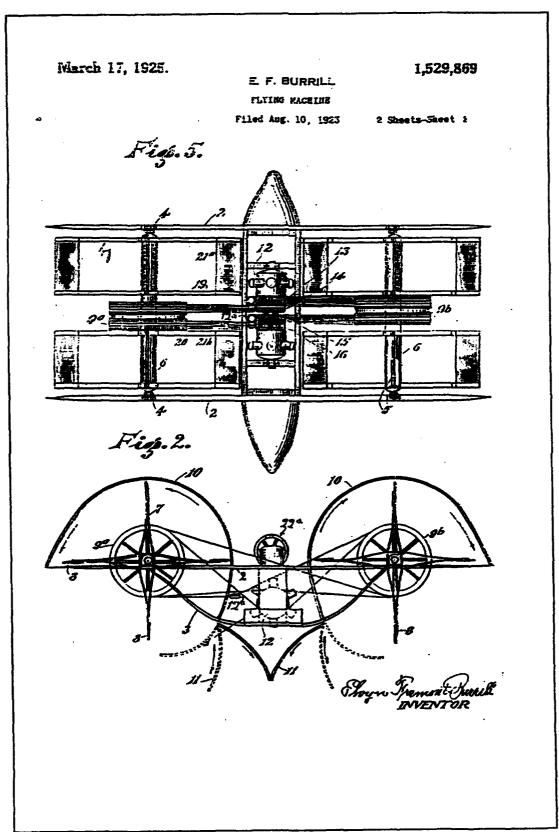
Burrill Patent of 1923 (Burrill, 1923)
